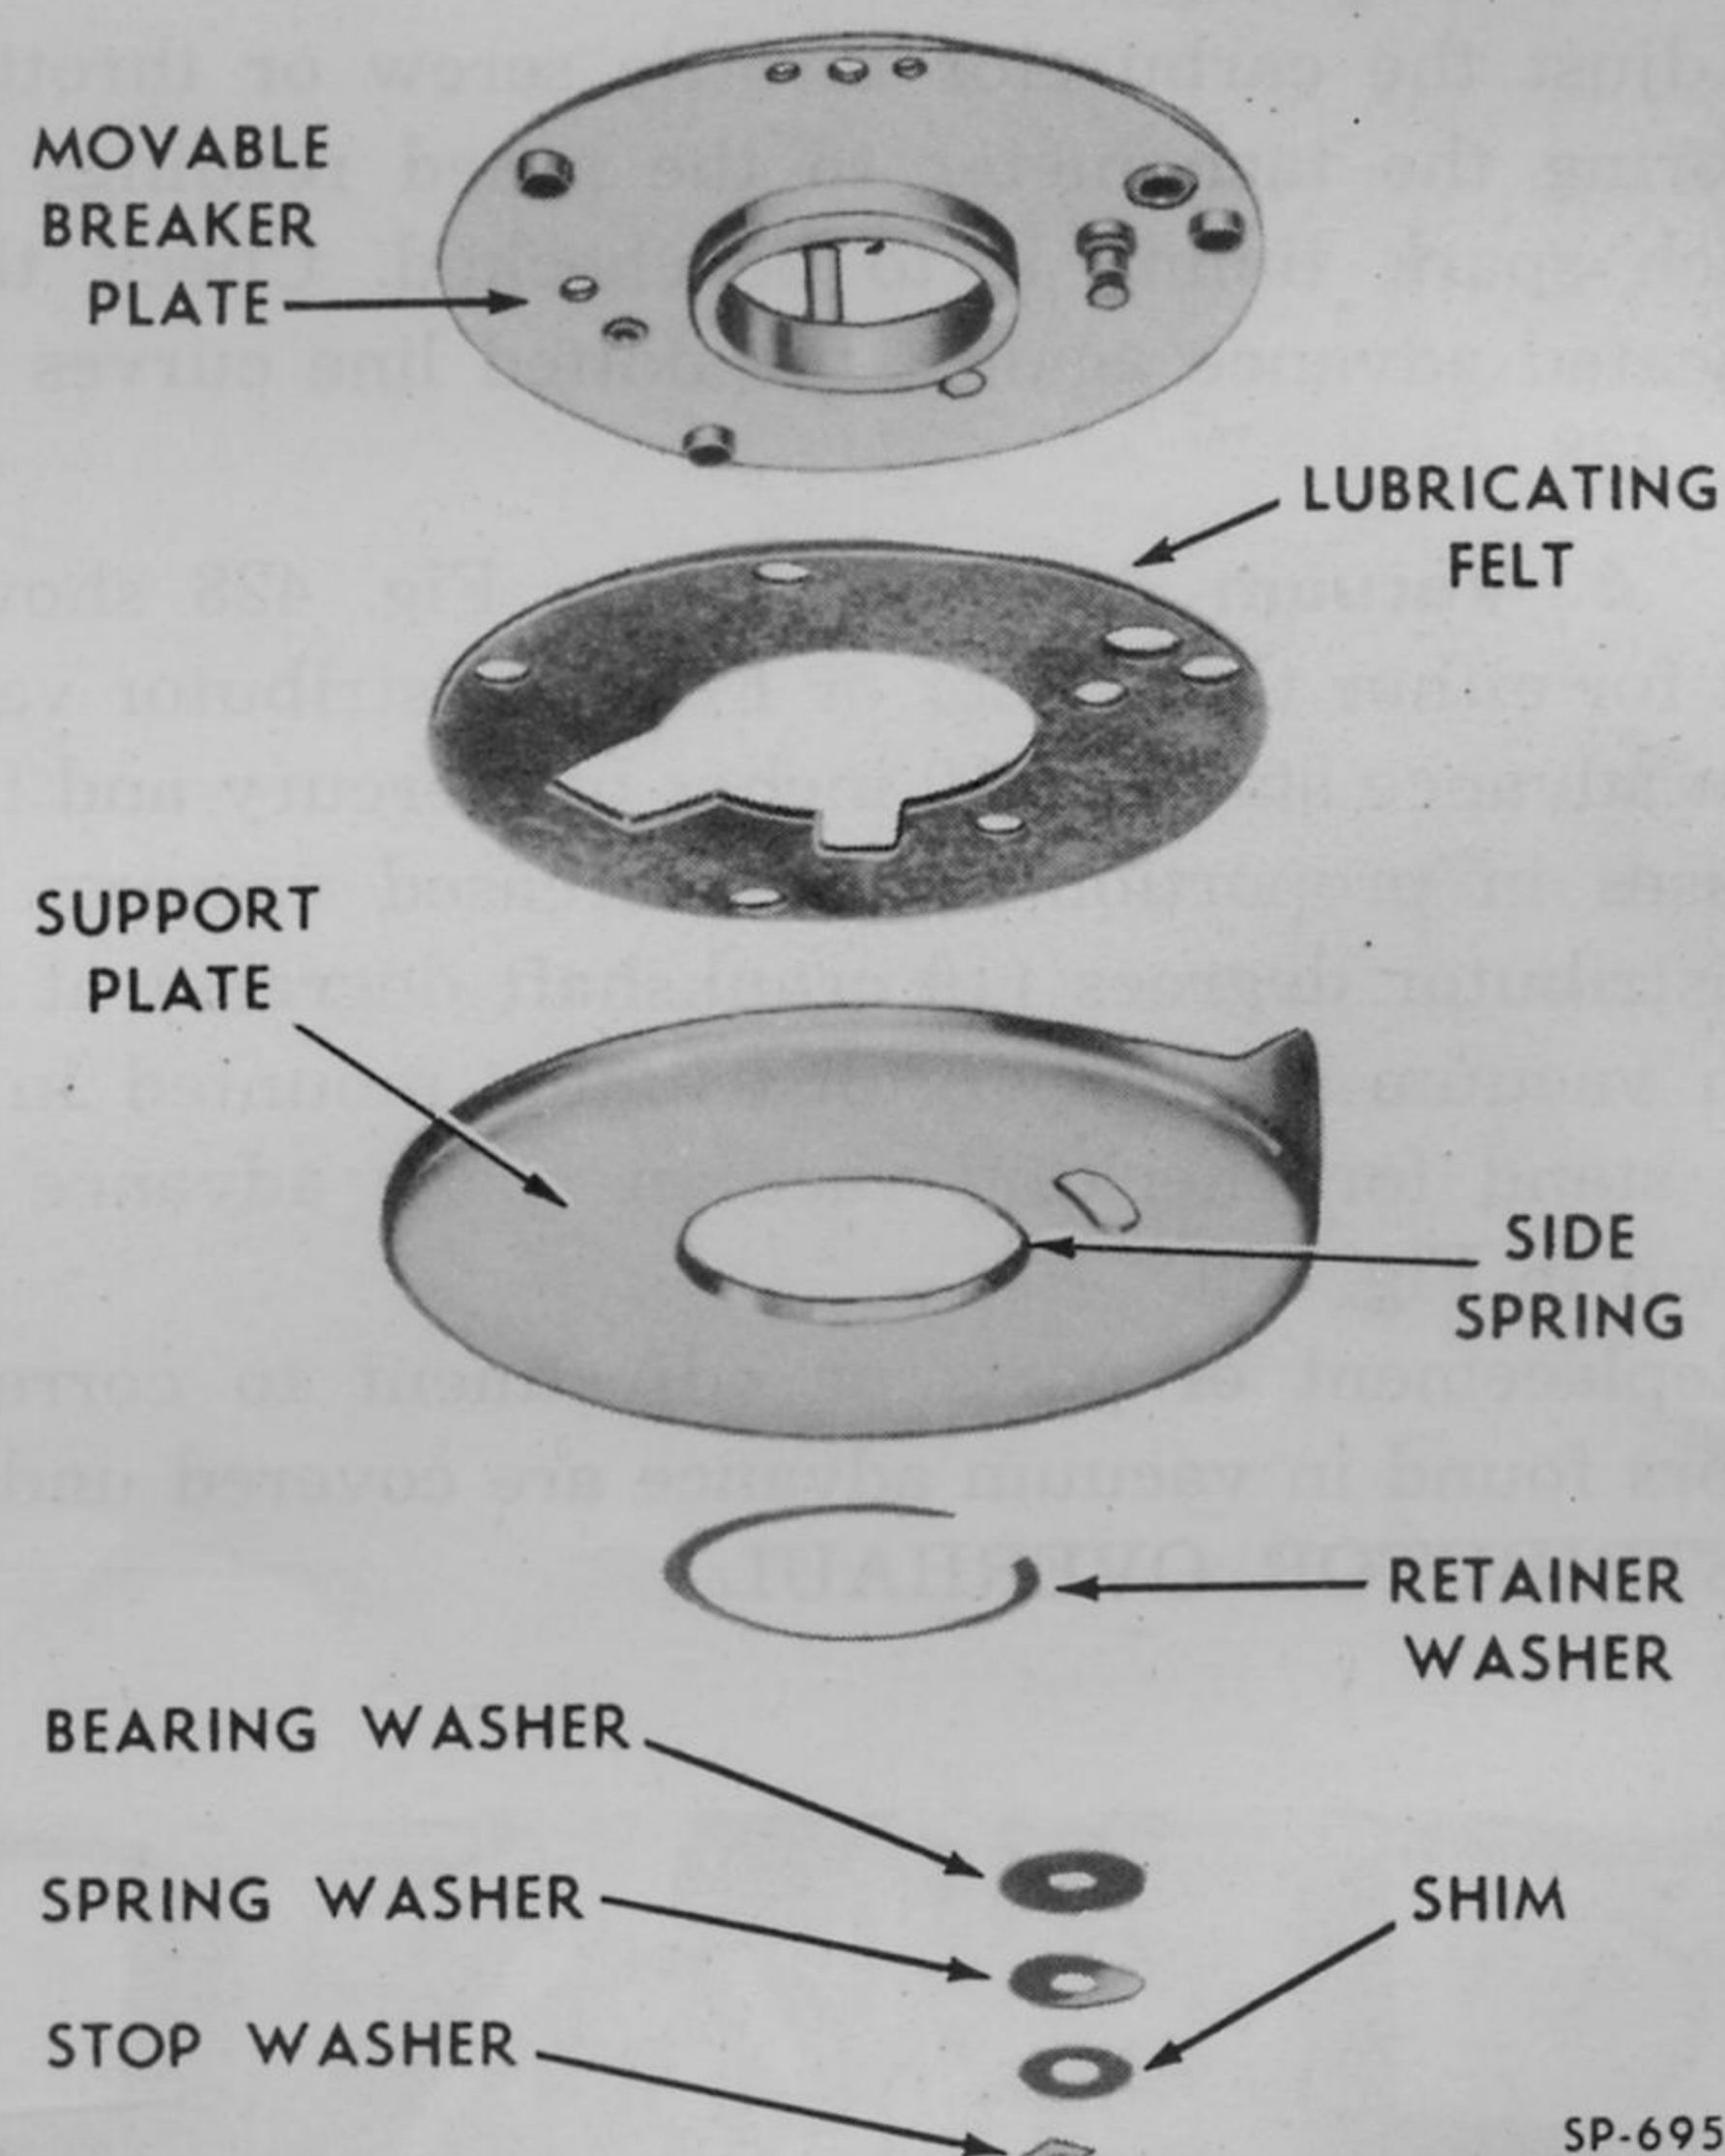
Kaiser Distributor Breaker Plate—Exploded View
